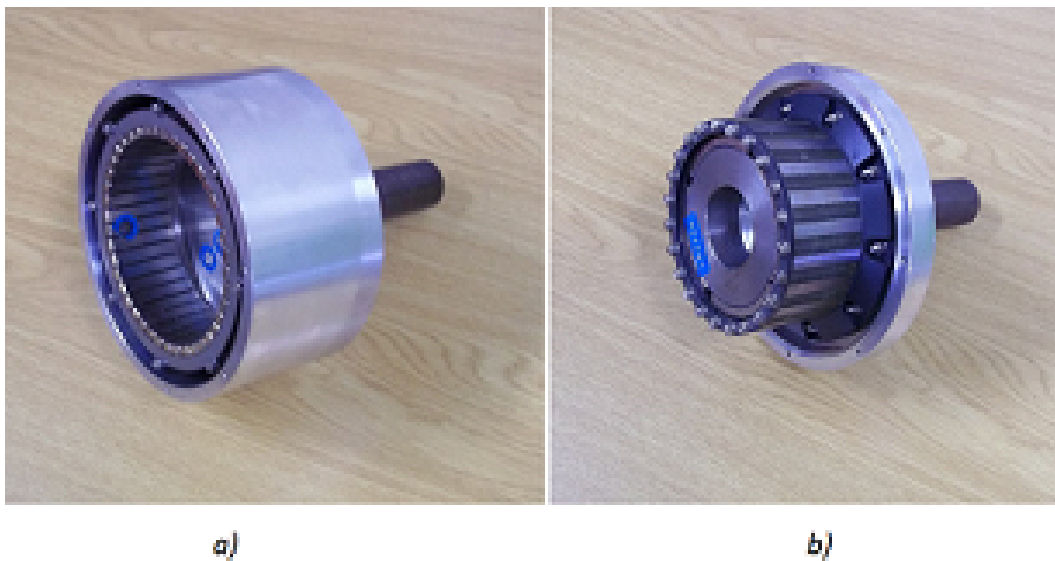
Flux modulated magnetic gear sub assemblies (a) LS sub assembly and (b) HS sub assembly with modulator
